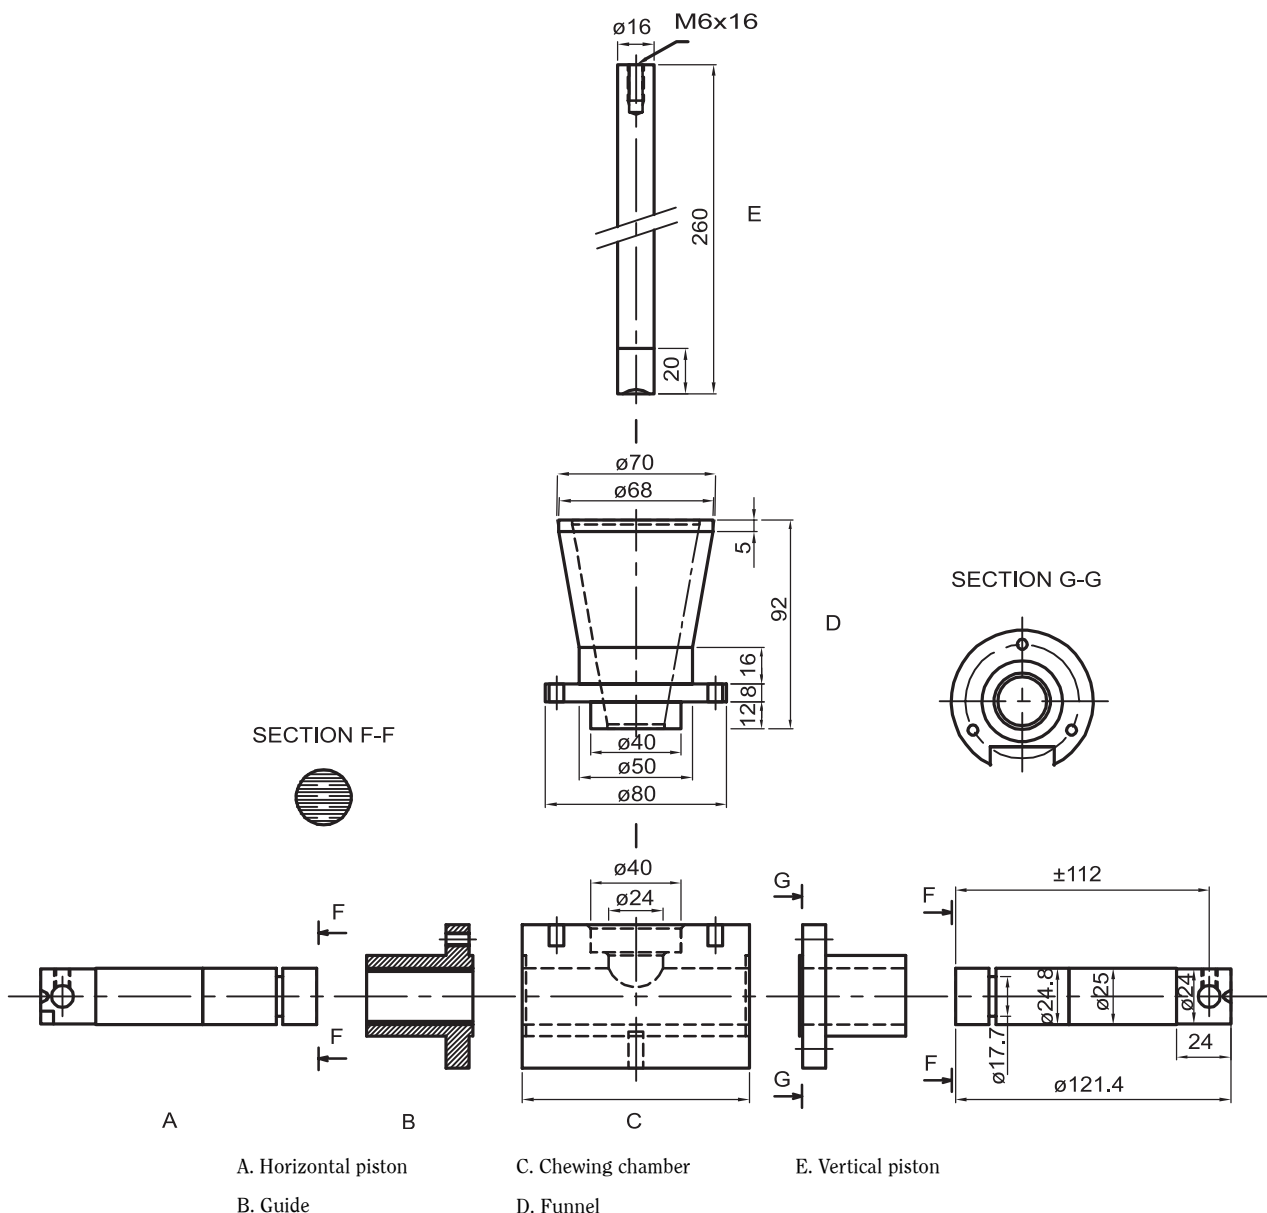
1 – Chewing chamber and pistons (dimensions in millimetres)
